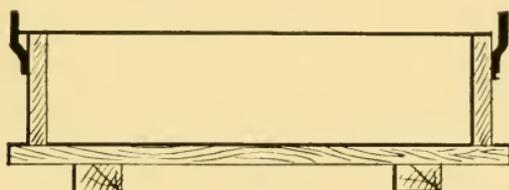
Bottom board and drag placed in place for bedding in face plate.
